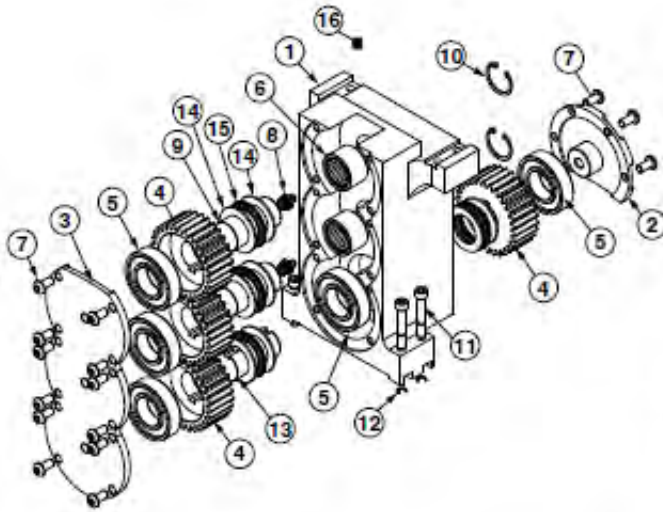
DANFOSS HYDRAULIC MOTOR ASSEMBLY (P/N HYD-R)
